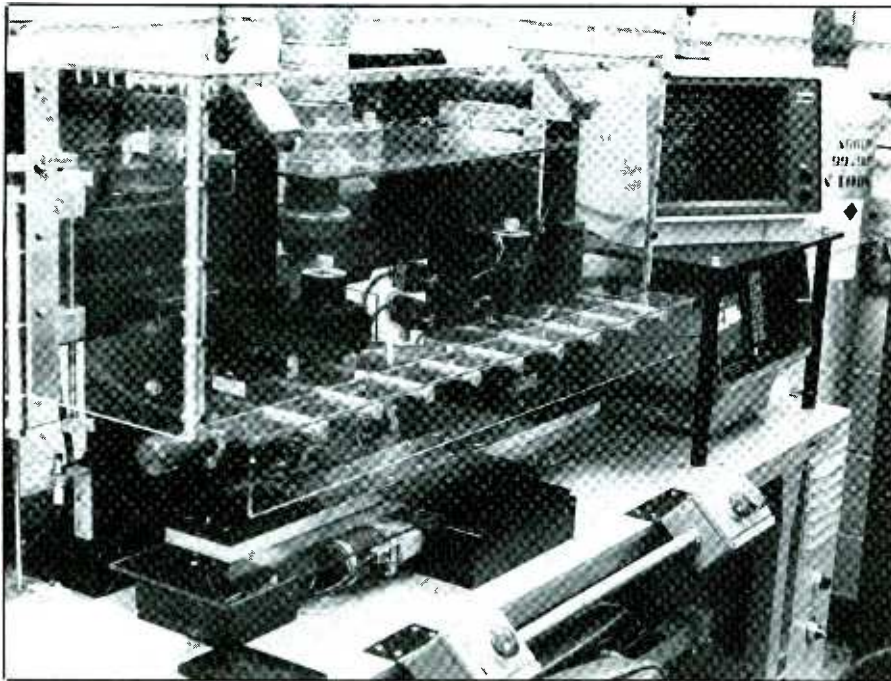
System view of an industrial process using an X-Y table to position parts under a laser beam.
